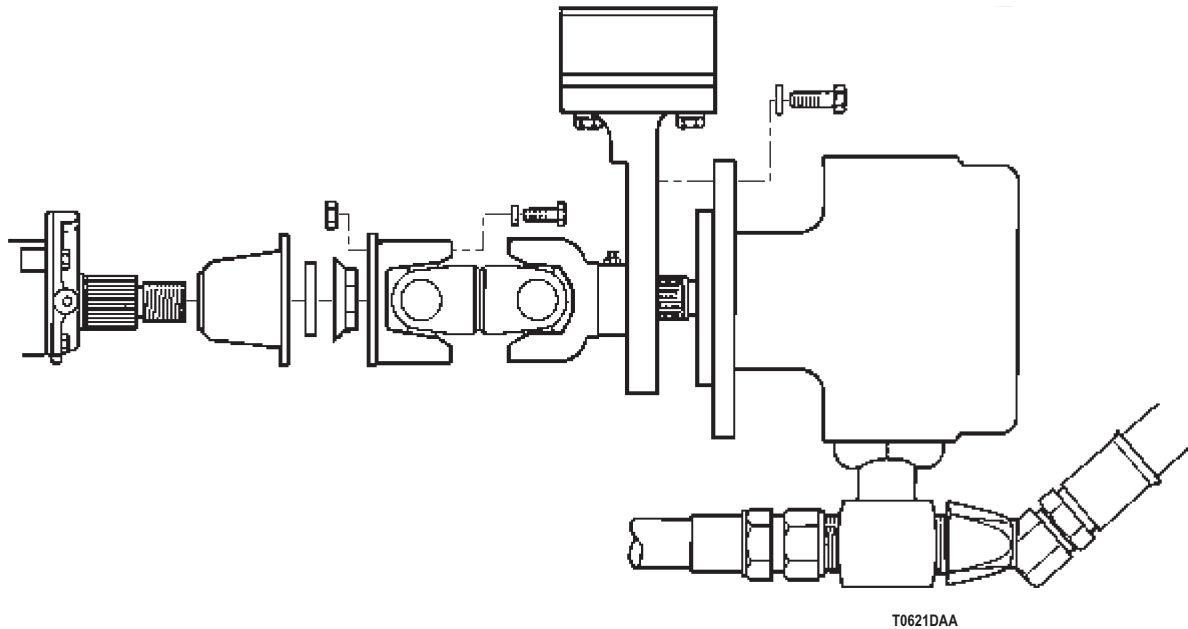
Transfer Case PTO to Hydraulic Pump Propeller Shaft.
